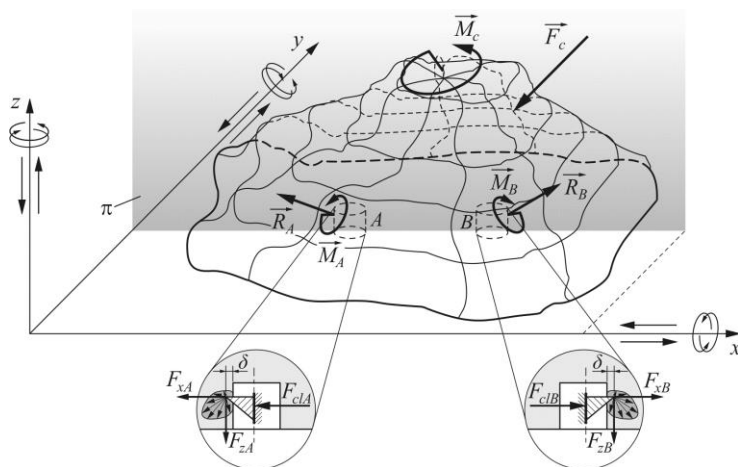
Schematic drawing of the proposed clamping of complex-geometry workpiece.
